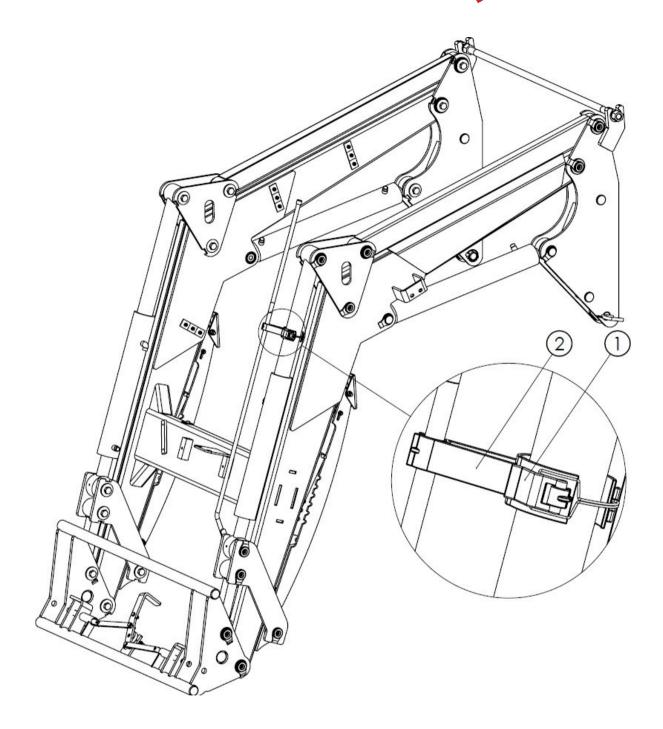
Adjusting the indicator (1 - lock; 2 - support)
